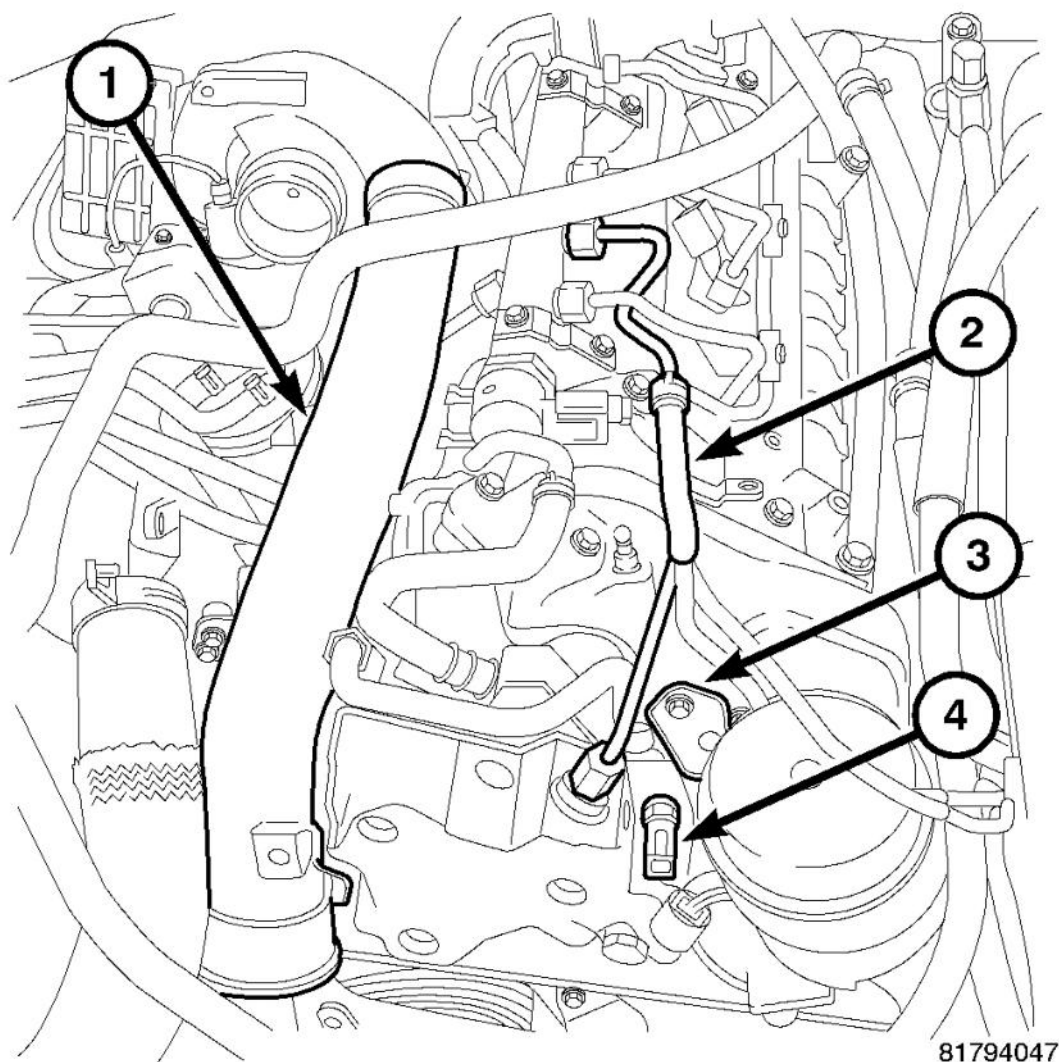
Air Cleaner Cover & Inlet Tube To Turbocharger
